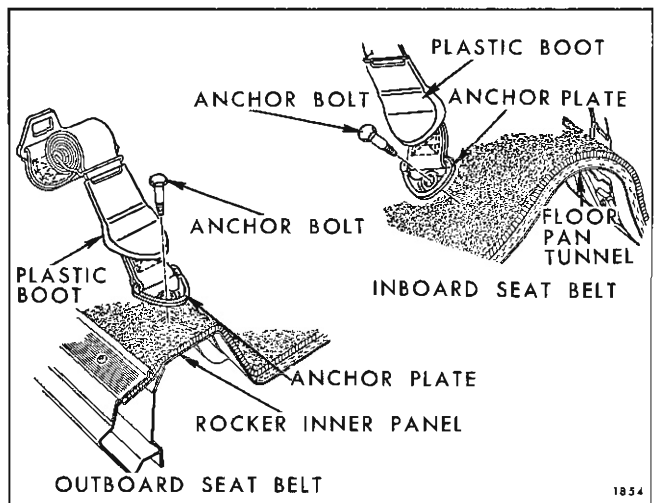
H38—Deluxe Seat Belt Attachments - 15000-16000 Series
